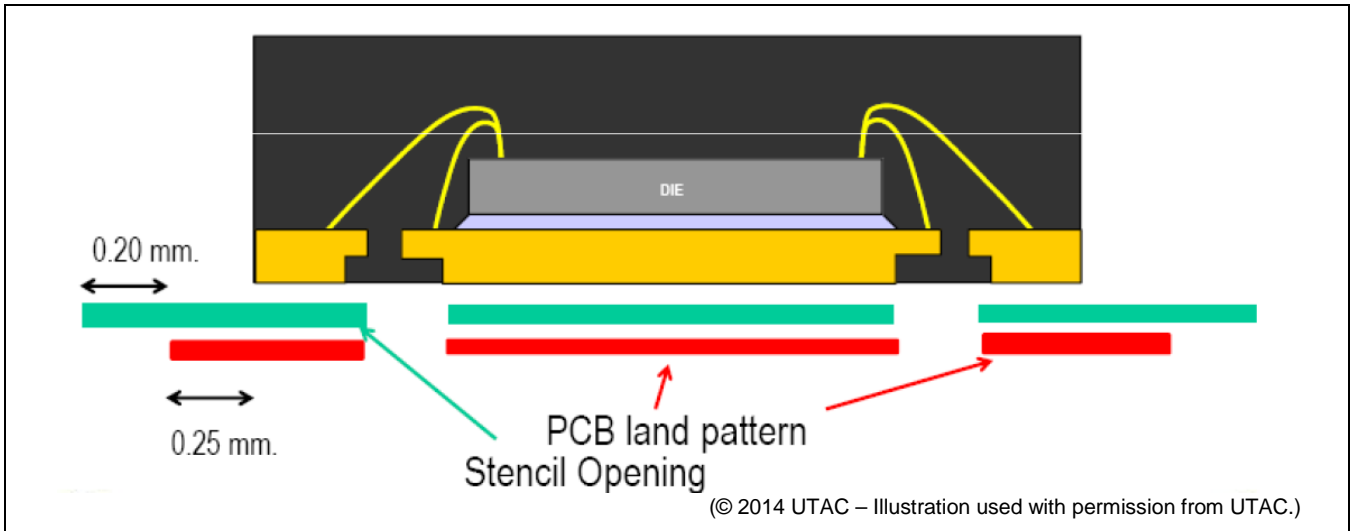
illustrates a suggested footprint for printed circuit board (PCB) designs using the ZSC31150 DFN14.
